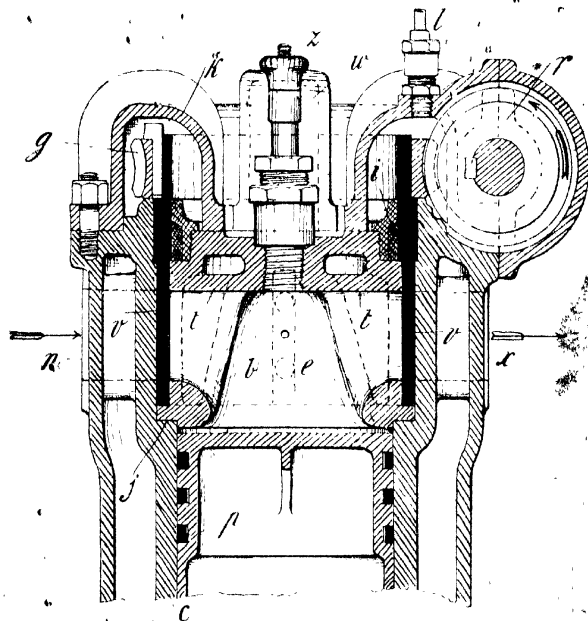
A.—Cross-section of cylinder head with double intake and exhaust controlled by a slowly revolving sleeve valve.
